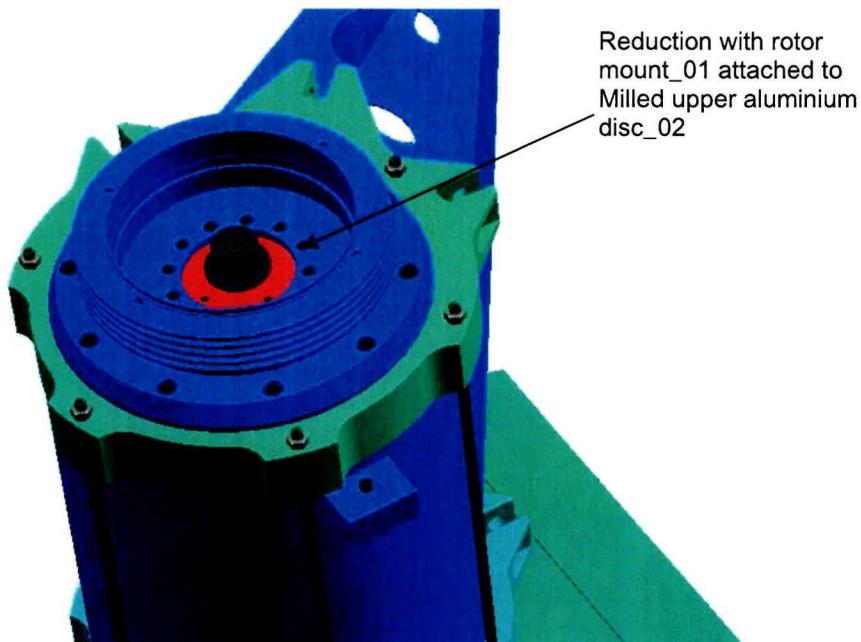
Reduction mounted to the “milled upper aluminium disc_02”
